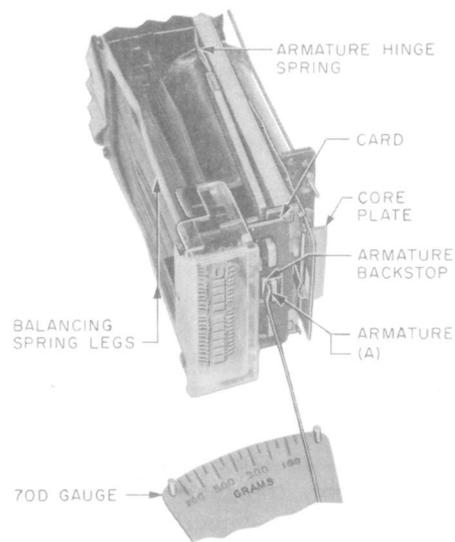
Method of Checking Armature Back Tension for AL Type Relay
